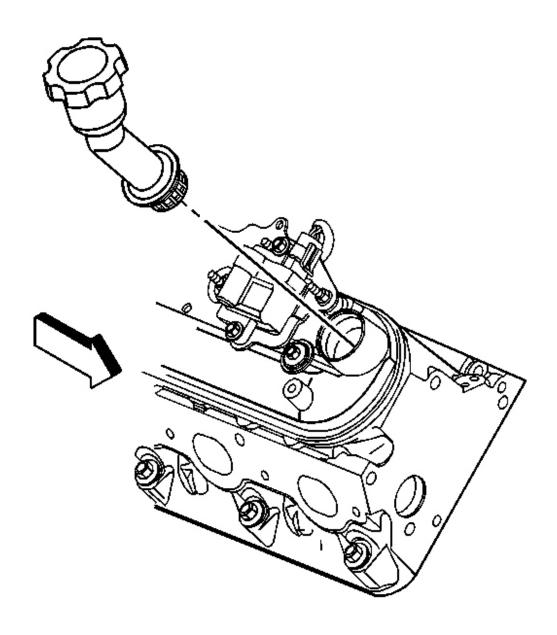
View Of Oil Fill Tube Courtesy of GENERAL MOTORS CORP.
